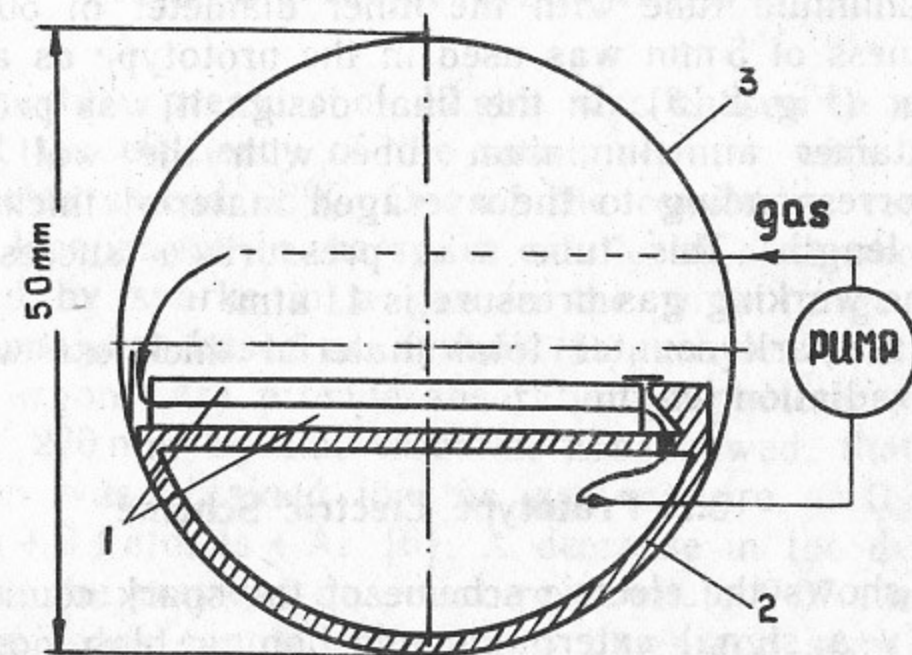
Principal mechanical design of the prototype: 1—electrodes; 2—plexiglass support; 3—aluminium tube.
